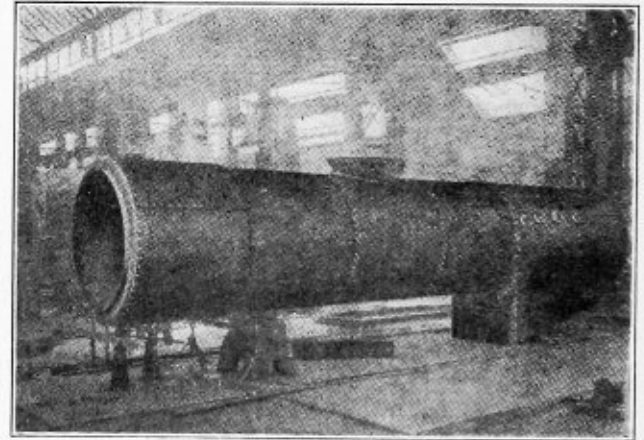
TESTING ALIGNMENT OF BOILER.
